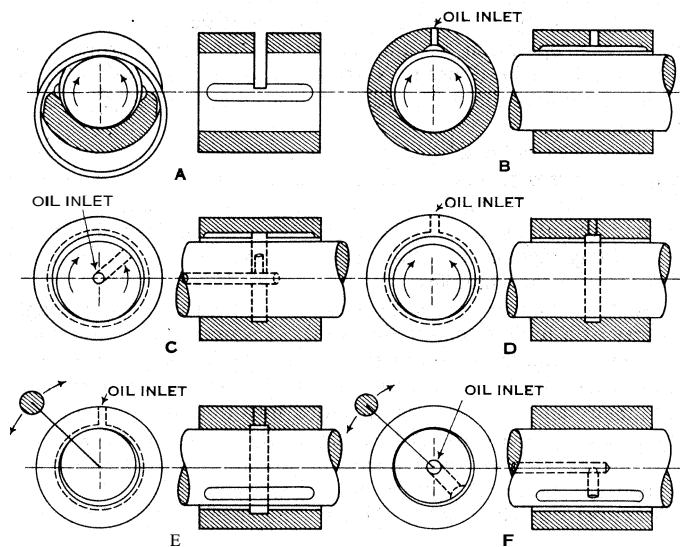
SIDE AND END VIEWS OF JOURNAL BEARING FOR RAILWAY FREIGHT CAR AXLES
